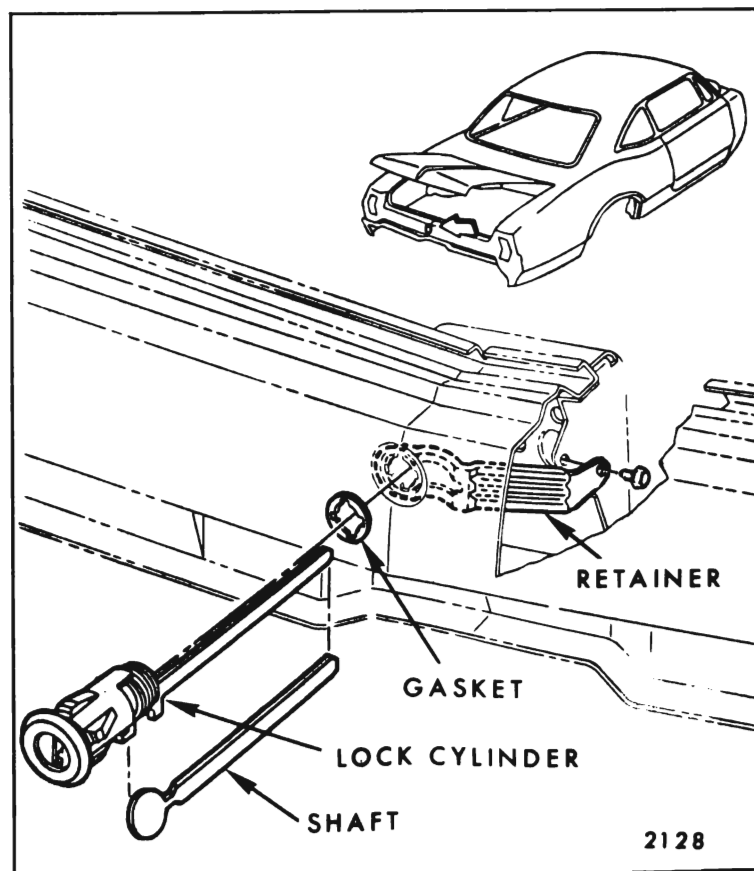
Rear Compartment Lid Lock Cylinder Assembly - Oldsmobile "B" Style Shown
